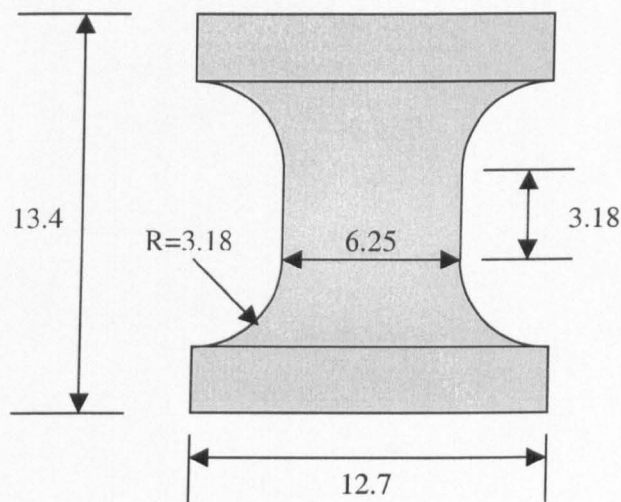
Bonded block type specimen. Dimension in mm
